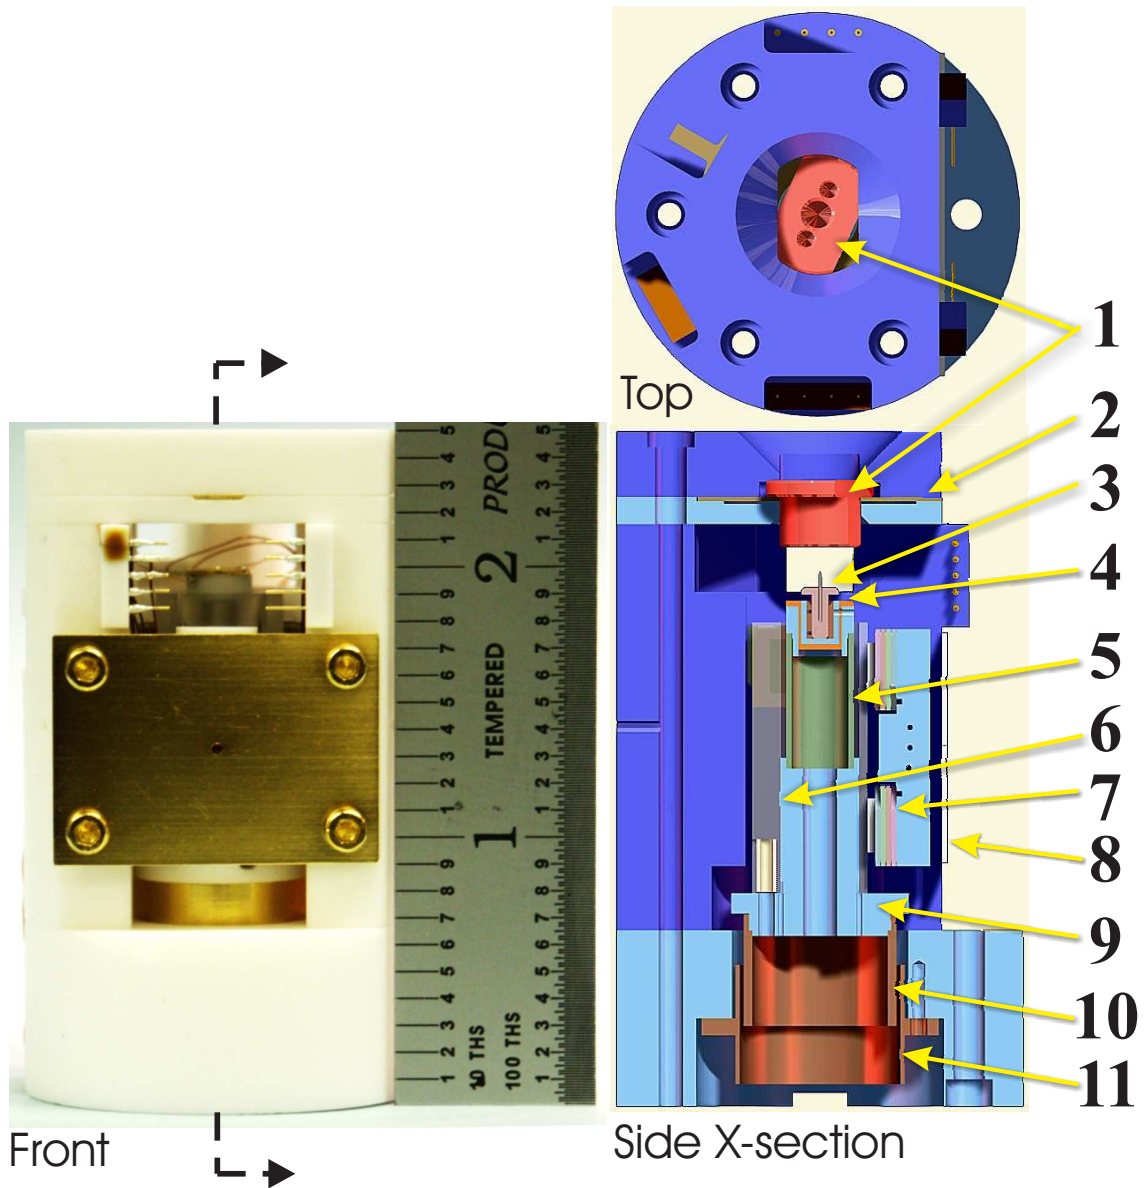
STM Assembled. The disassembled parts are shown in Fig. 2.7. 1) Sample stud. 2) BeCu spring plate. 3) Tip. 4) Tip holder. 5) Tube scanner. 6) Sapphire prism. 7) Walker. 8) Front spring plate. 9) Scanner holder. 10) Inner capacitance plate. 11) Outer capacitance plate.
